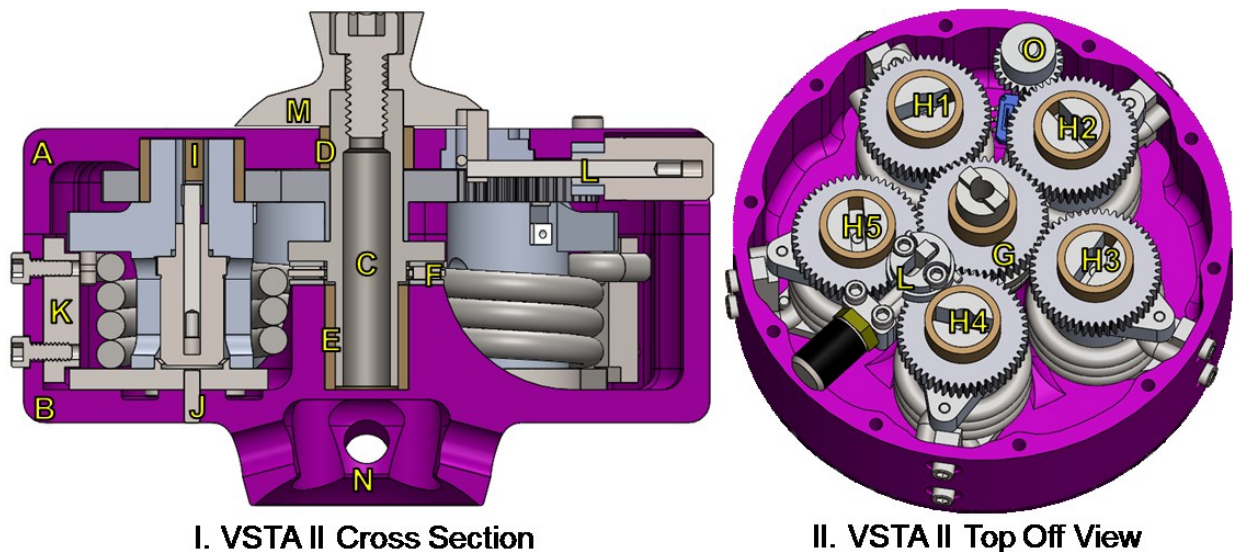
VSTA II Overview: A – upper housing, B – lower housing, C – center shaft, D – upper shaft support bushing, E – lower shaft support bushing, F – shaft needle roller thrust bearing, G – center gear, H 1-5 – five subunits, I – subunit upper support bushing, J – subunit lower support pin, K – ground bar, L – locking mechanism, M – male pyramid adapter, N – female pyramid adapter, O – rotational position sensor.
